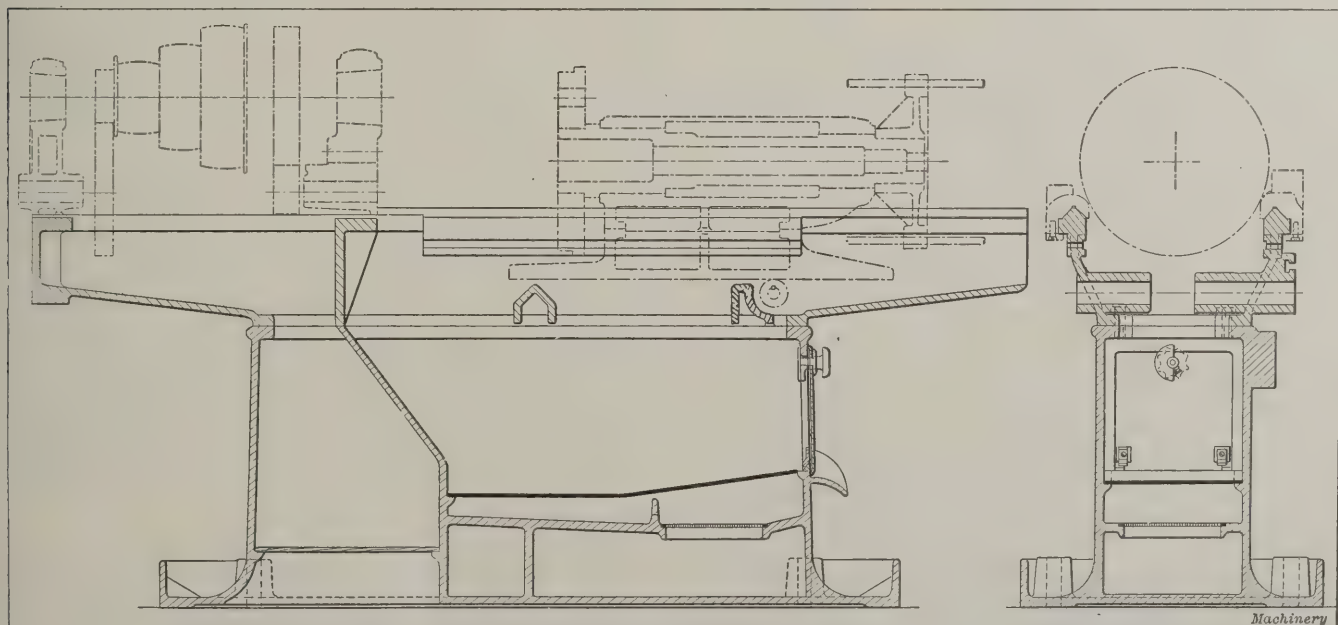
Bed for the Pittler Turret Lathe as built by the Leipziger Werkzeug-maschinenfabrik, Leipzig-Wahren, Germany
